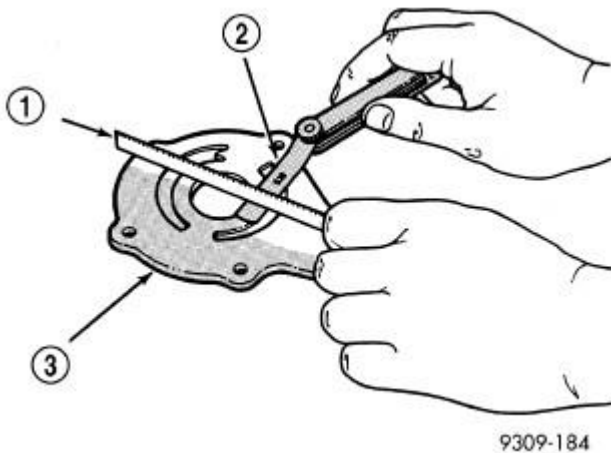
CHECKING OIL PUMP COVER FLATNESS - TYPICAL
